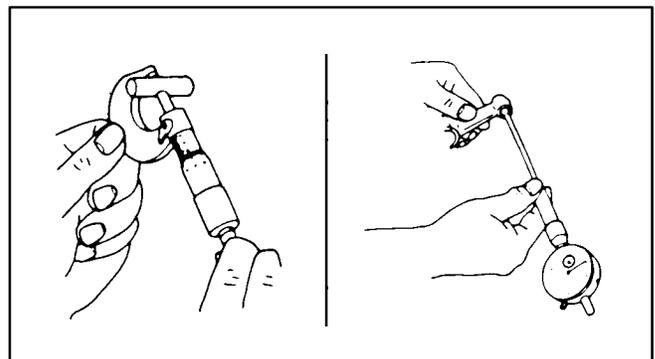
PISTON PIN TO CONNECTING ROD CLEARANCE
